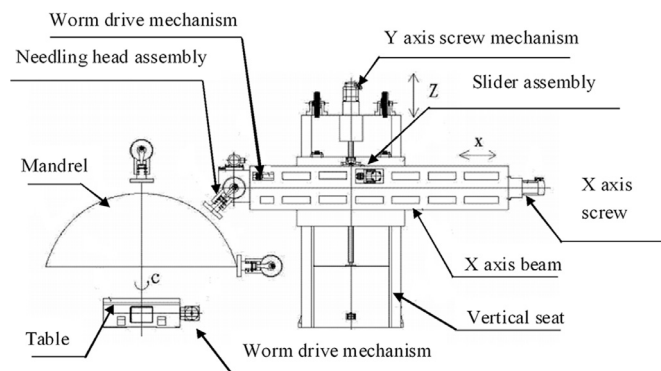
Schematic view of a CNC needle-punching machine [20].
